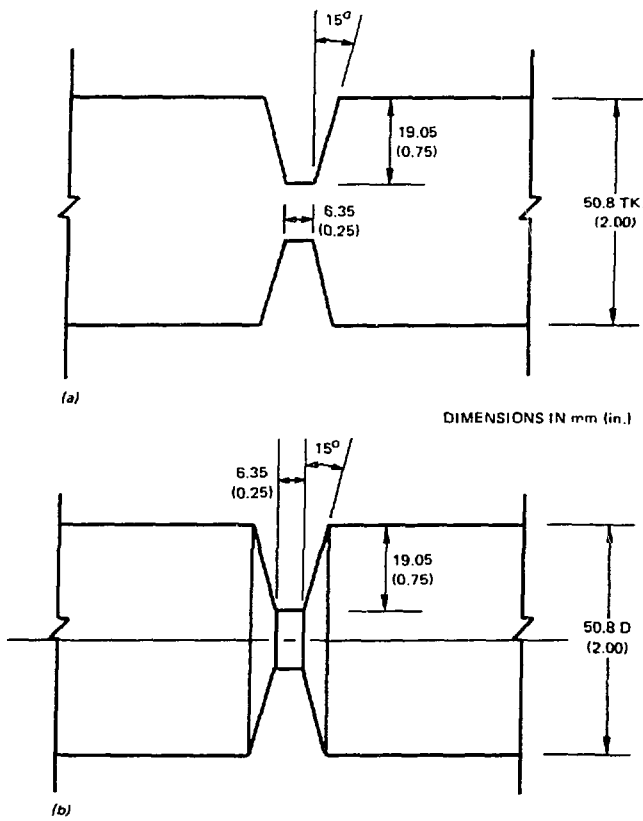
Weld grooves for tubular specimens. (a) Longitudinal grooves in flat plate. (b) Circumferential groove in round bar.
